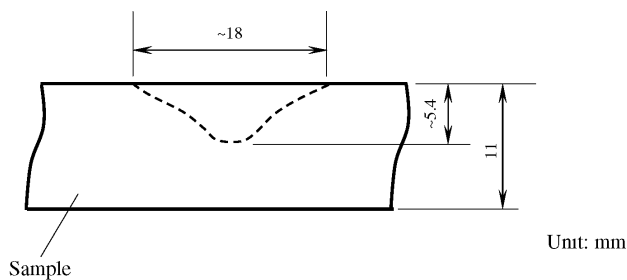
Partial-penetration mode (the FS weld nugget indicated with a dashed line)
